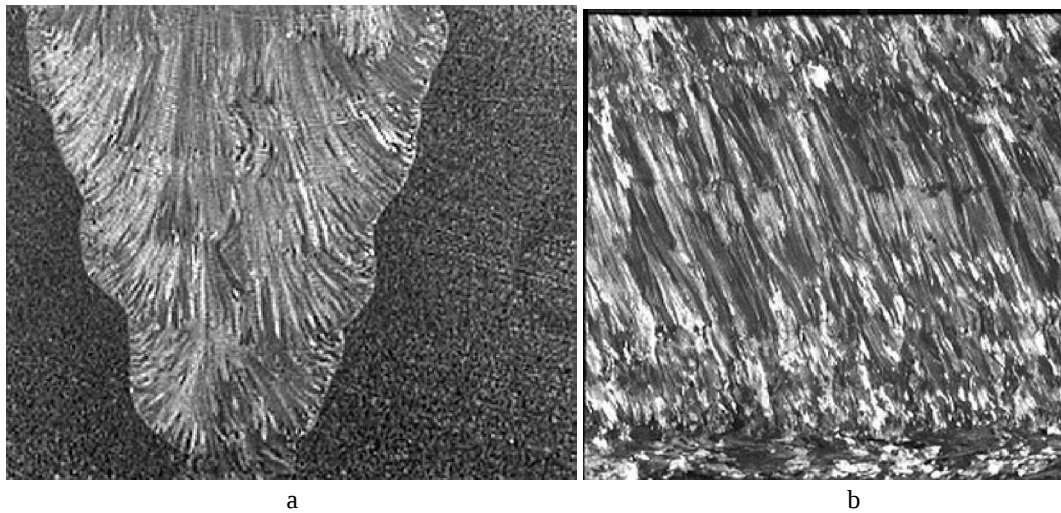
Transverse (a) and longitudinal (b) sections of a weld fabricated in the vertical-up position.
